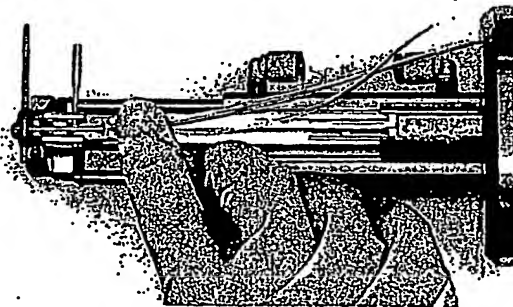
Loading Inner Unsupported Subassy Into Fixture
